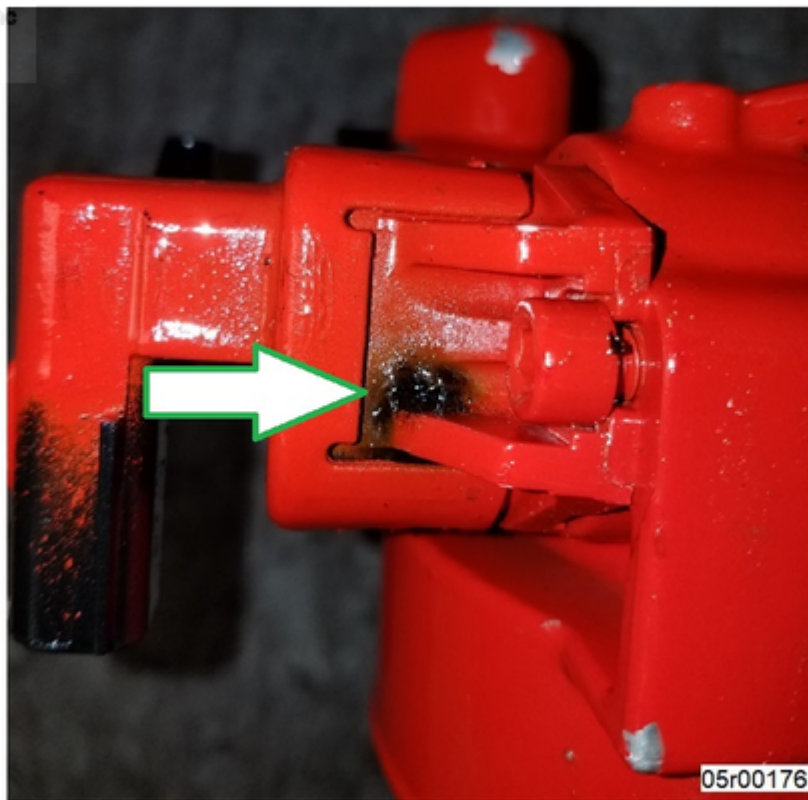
, Damaged Engine Fuel Heater Component and Fuel Leakage.
